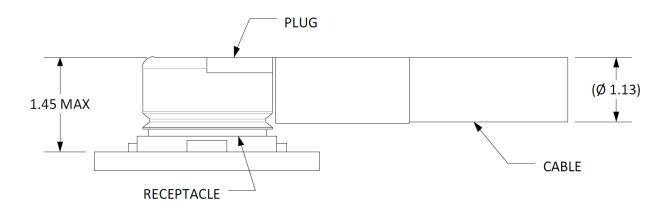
Connection between Receptacle and Mating Plug Using Ø1.13mm Coaxial Cable
